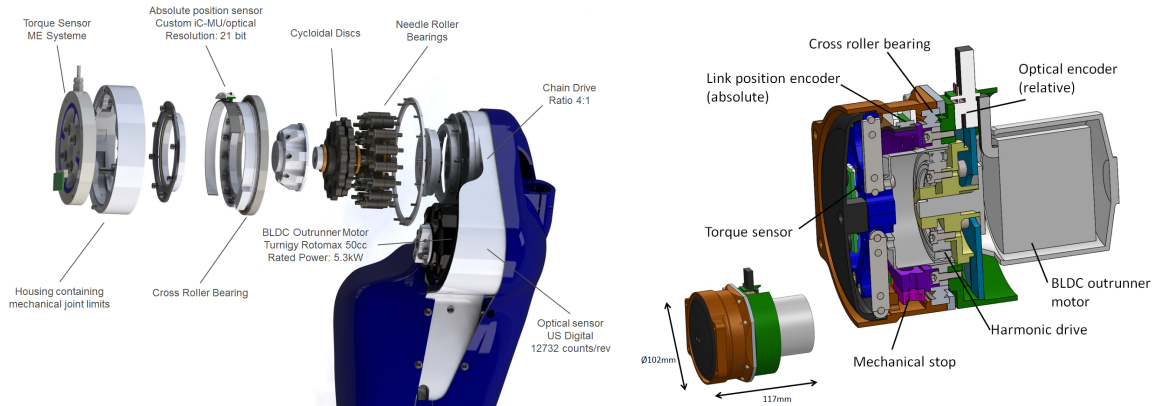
DURUS had two actuated joint types: a *high power* (left), and *low power* (right) joint. The high power design used a custom cycloidal gearbox, which is shown in an exploded view. For joints which did not require large torques a compact harmonic drive was coupled with a smaller BLDC motor, the coupled geometry is shown in a cutaway profile.
